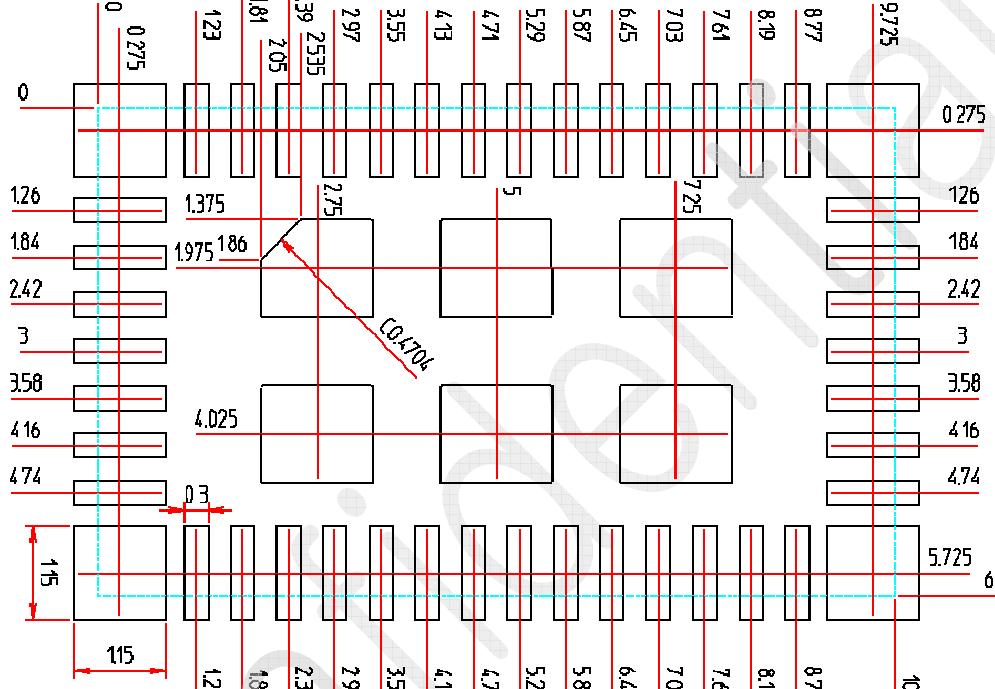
Recommended PCB and Land Patterns (Top View)
